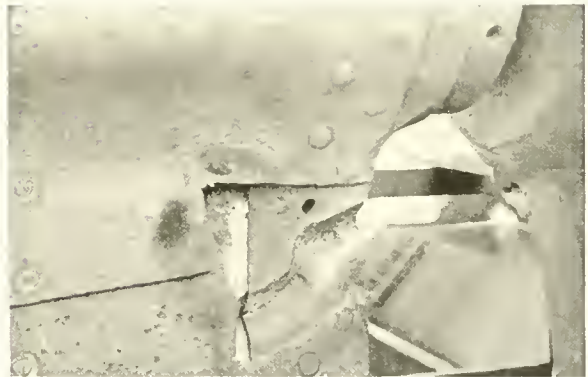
Broken stern post on S. S. Cygnus before welding. Note that the break has been chipped out to a "V" shape for welding.
